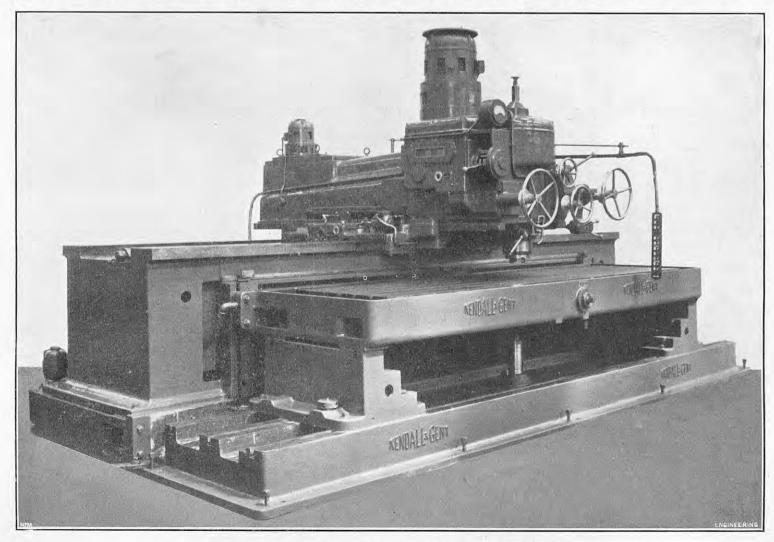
VERTICAL MILLING MACHINE; KENDALL AND GENT, LTD.
